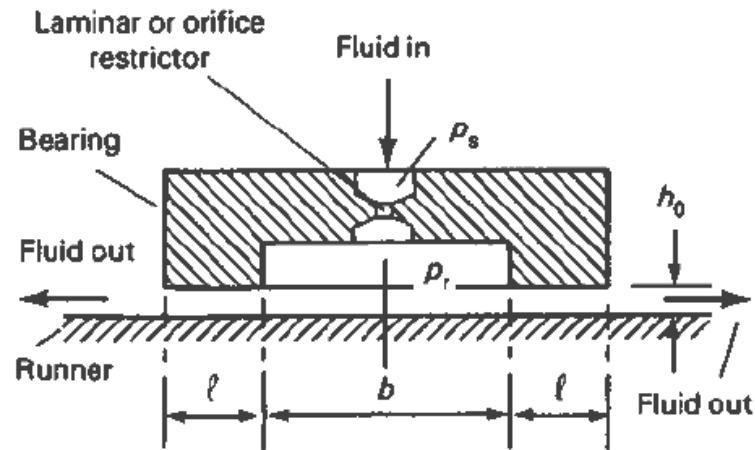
schematics showing the key parameters that determine the operation of a hydrostatic bearing. Nomenclature: p_s , supply pressure; p_r , recess pressure; h_0 , film thickness; b , bearing pocket diameter; l , bearing load thickness[15].
